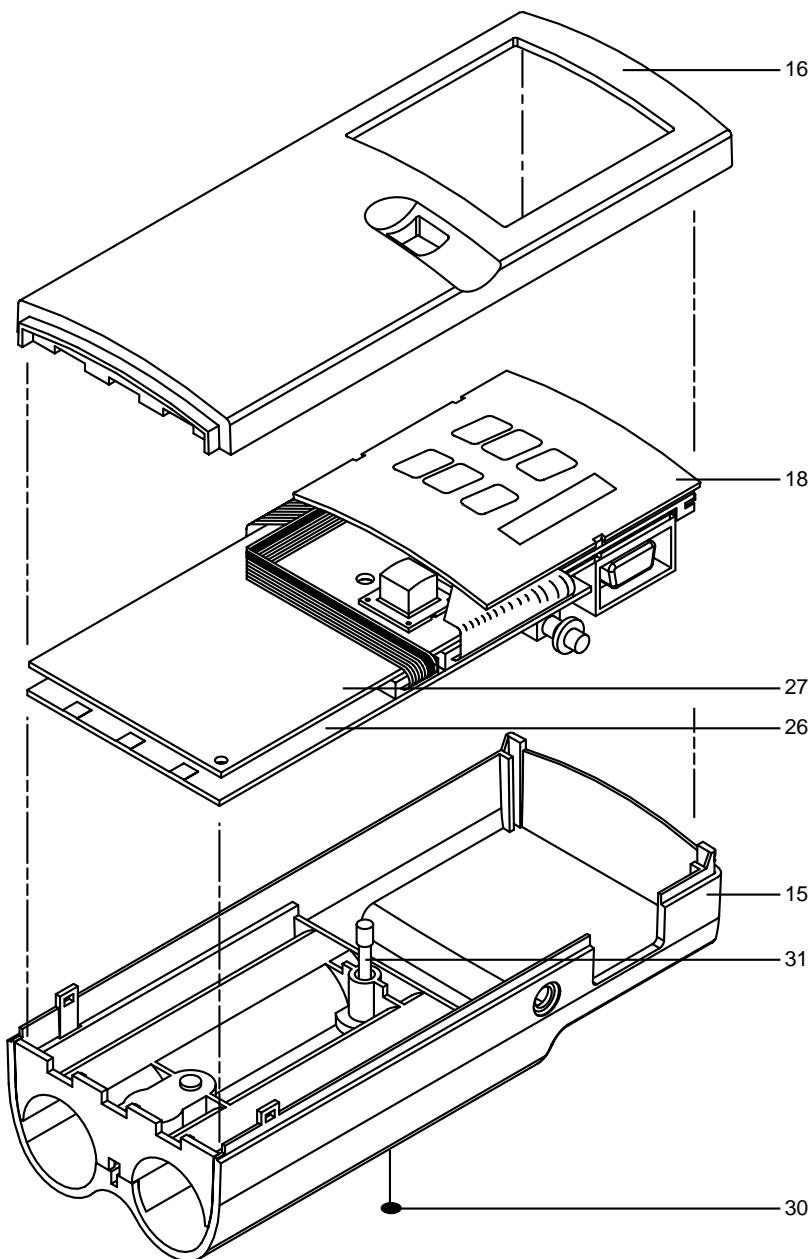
N-20 Covers with the PCB and Display Assembly
